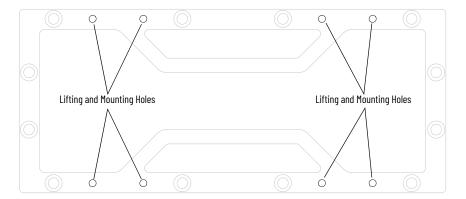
Bottom Structural Mounting Ring Lifting and Mounting Holes
